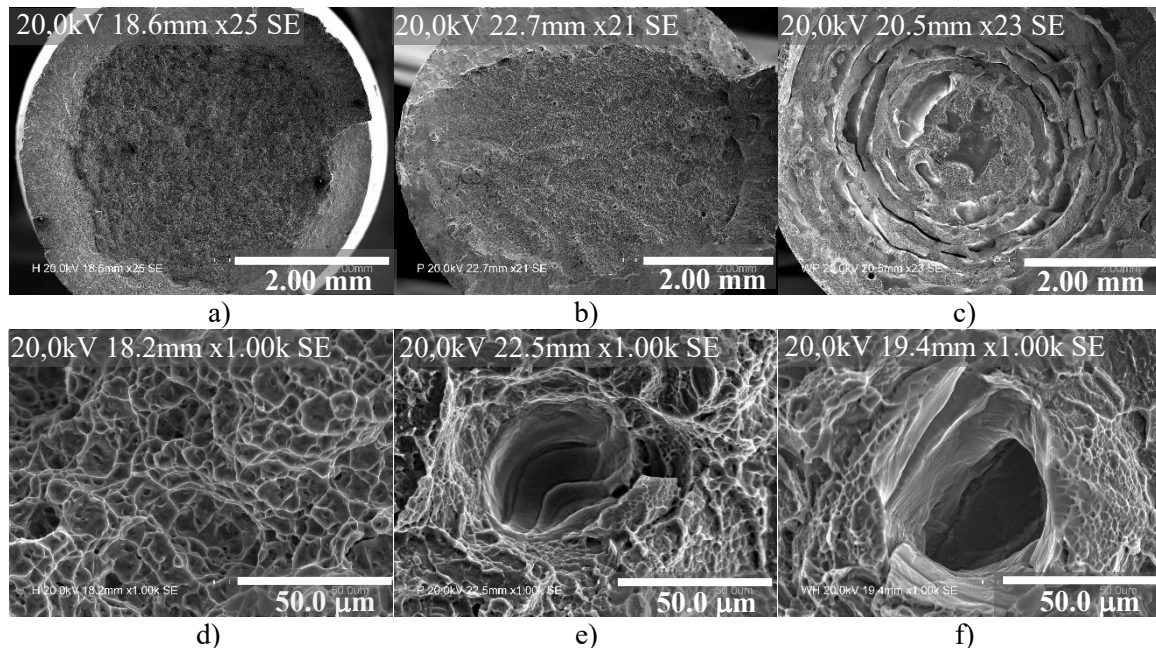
SEM images of fractured surfaces of tensile specimens, made by machining (a, c), additively manufactured (b, e) and W2 welded parts (c, f) (scale bar: 2.00 mm (top) and 50.0 μm (bottom))
